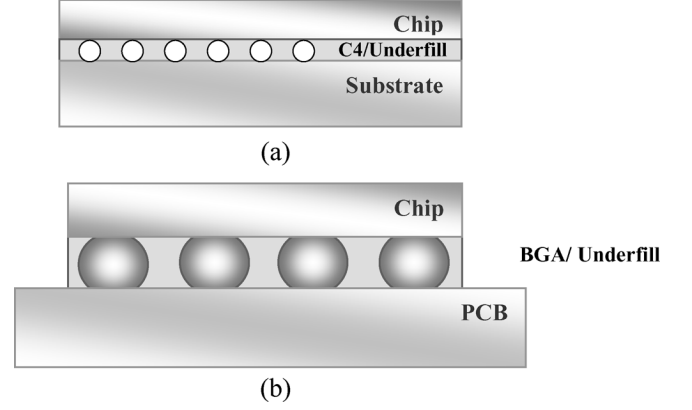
Schematics of (a) chip scale package (CSP) and (b) chip on board (COB) assembly.
